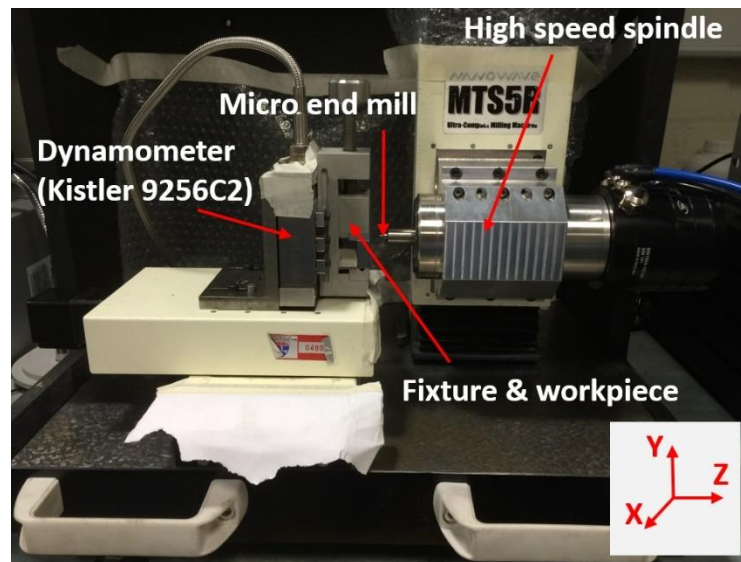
Configuration and machine tool with Kistler dynamometer
